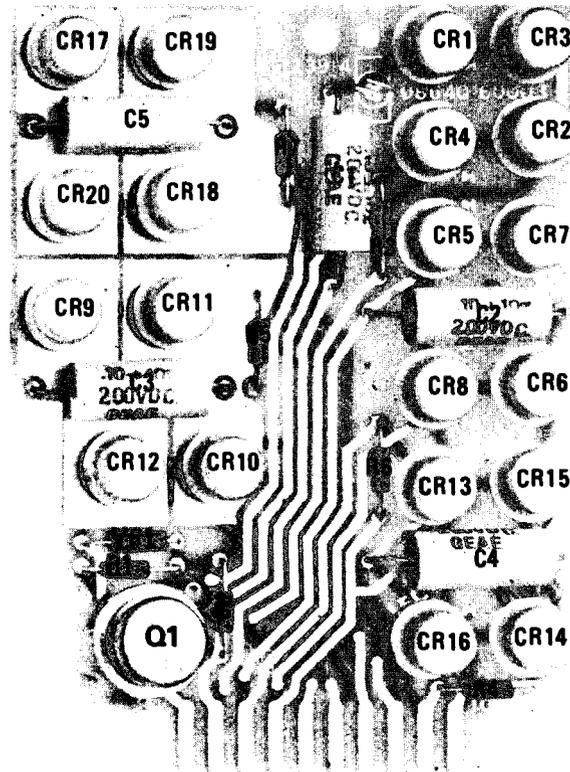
A12 Rectifier Assembly Component Locations Backdating (Change C)
